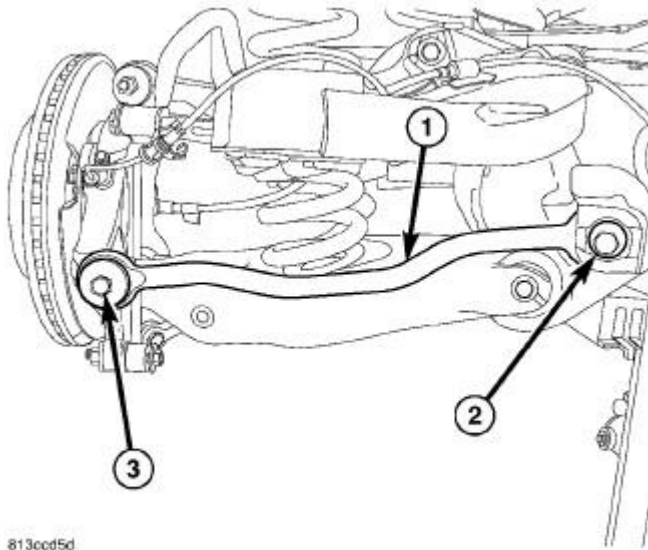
Toe Link, Mounting Bolt & Cam Bolt
